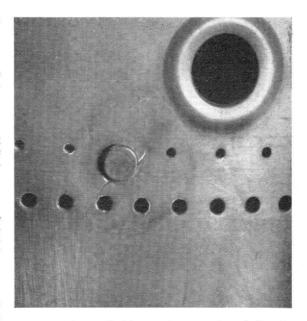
A repairable crack at a rivet hole; inaccessible for repair unless the rivets and cooling skirt are removed.
